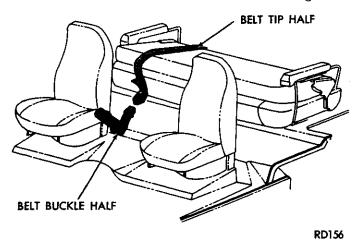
Folding Rear Seat Retention CONSOLE (FIG. 11)
